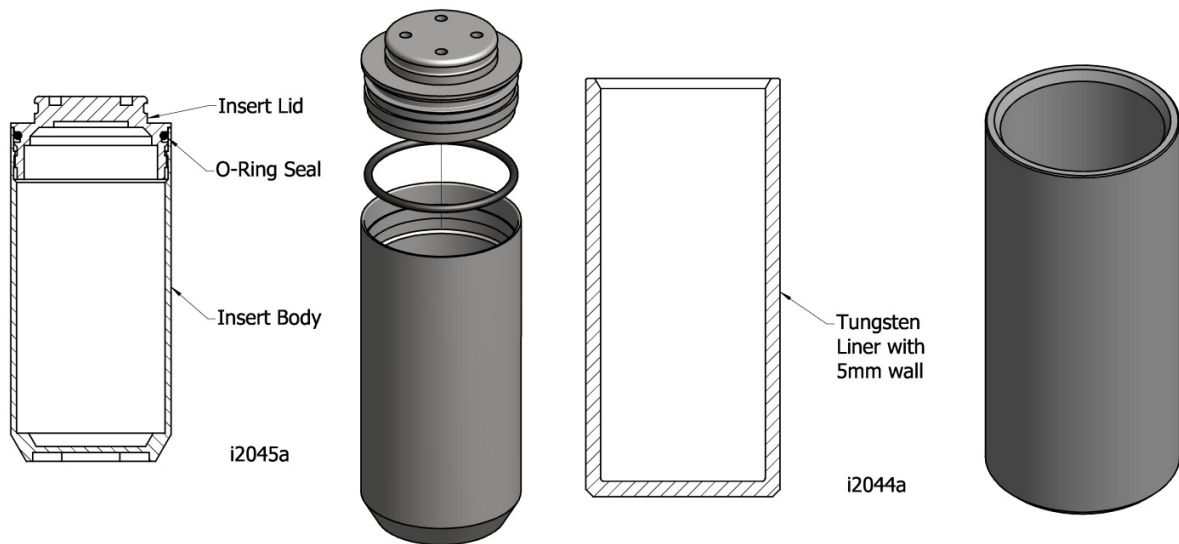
Shielding insert HS-50x85-SS– Design # 4081 with Tungsten liner
